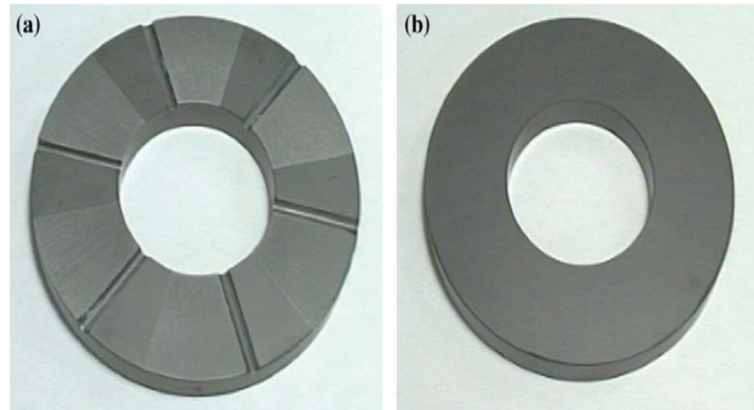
Partial surface texturing of a stator (a) in contact with plain rotor (b) [2]
